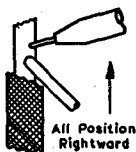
ALL-POSITION RIGHTWARD WELDING
